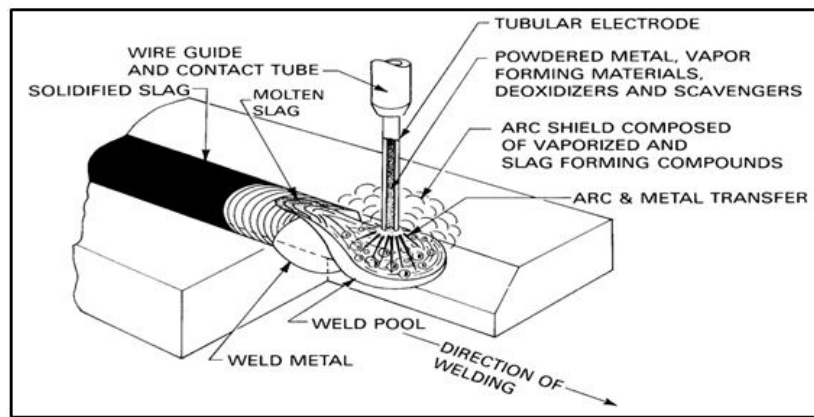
Flux Cored Arc Welding (FCAW)
